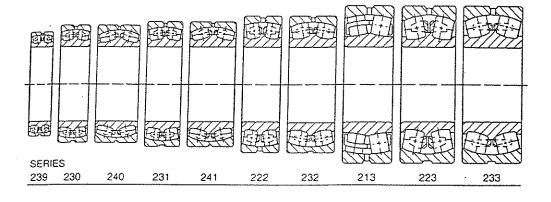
A graphical illustration of the ten dimensional series of spherical roller bearings available conforming to ISO and ANSI/ABMA standards
